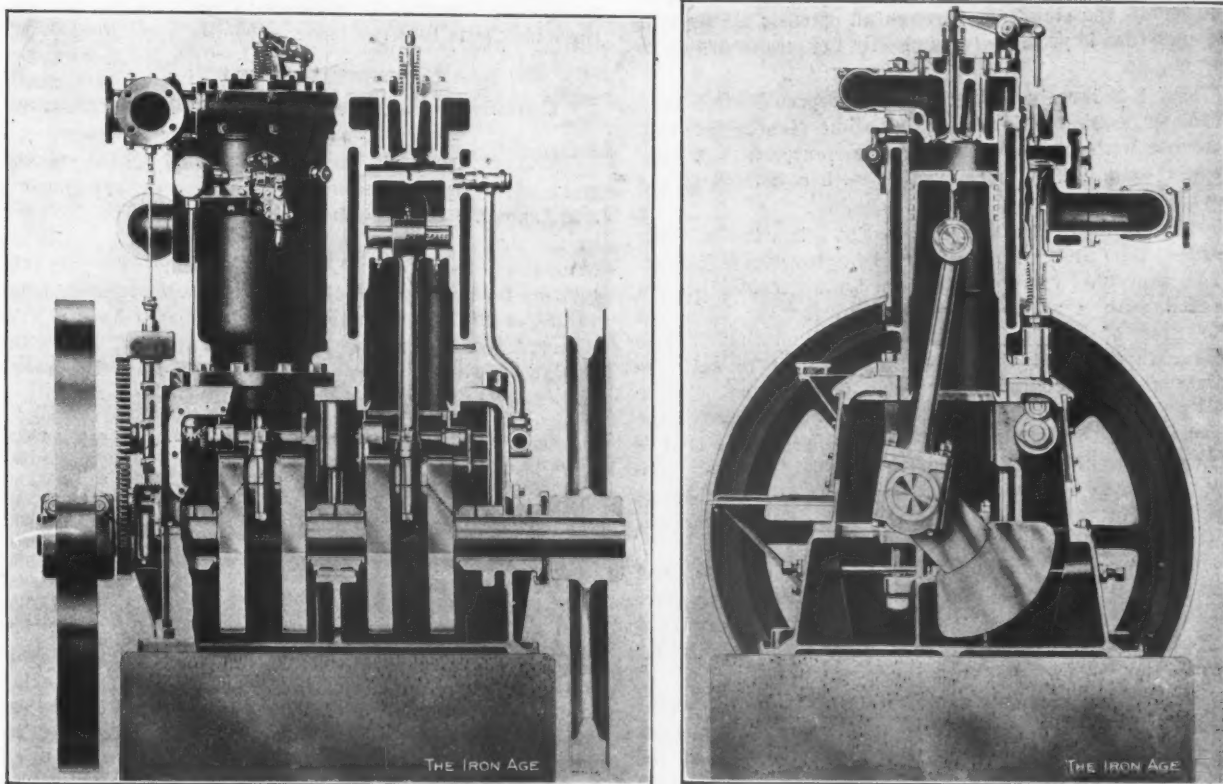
Side Elevation Partly in Section and Sectional End Elevation of the Fairbanks-Morse Vertical Two-Cylinder Gas Engine.
